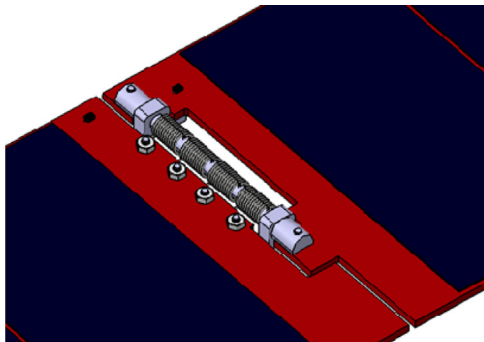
Secondary hinge assembly mounted on the solar panels in deployed configuration.
